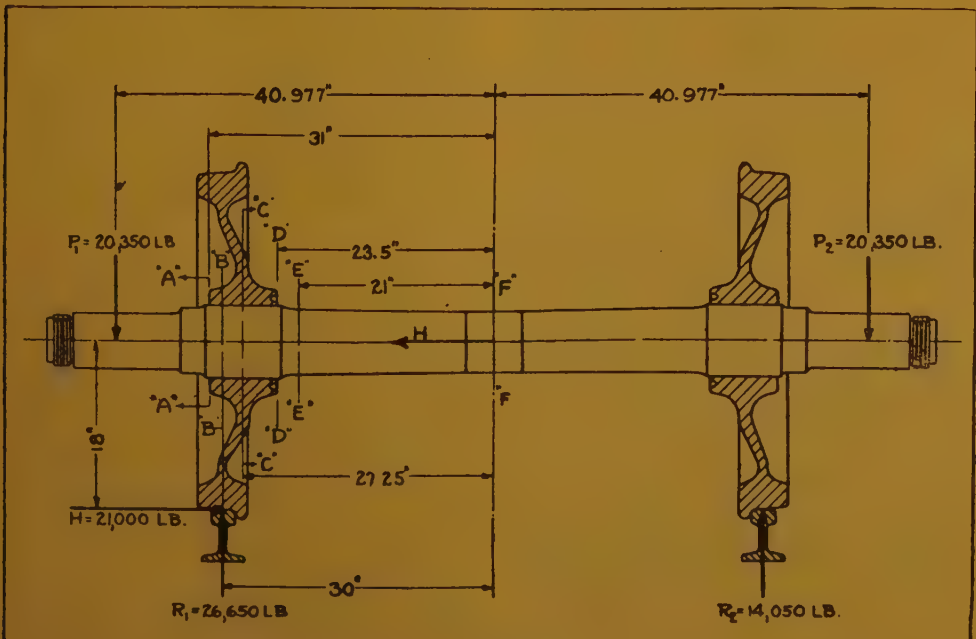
Axle-stress calculations for outboard-bearing axle under the loading shown.
